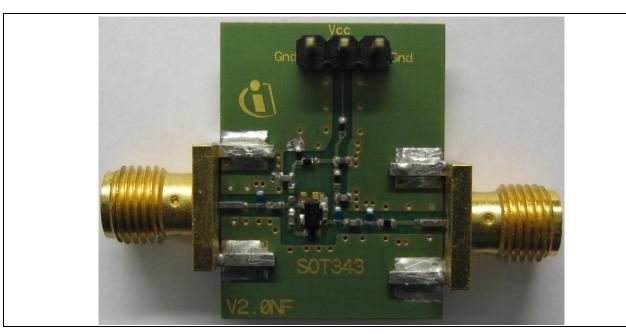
Photo of Evaluation Board (overview) PCB Marking M101022 V2.0NF SOT343
